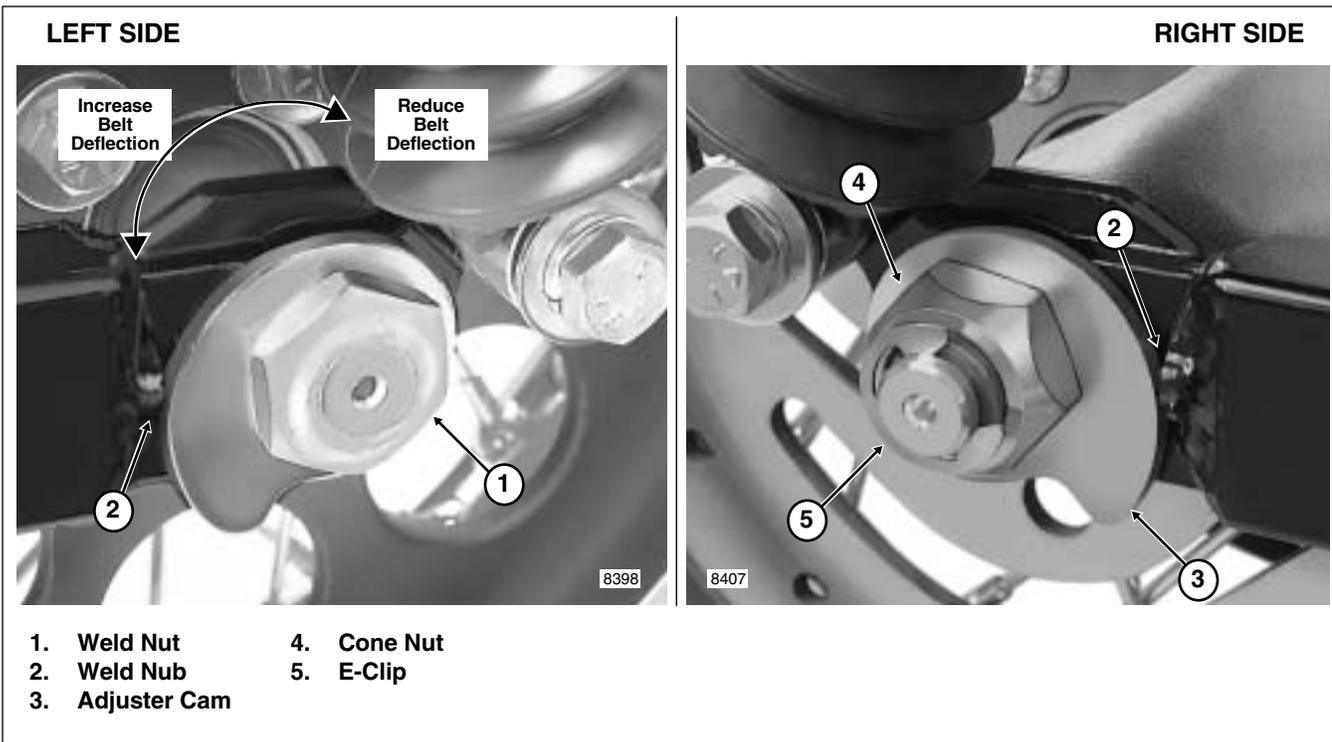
Move Rear Wheel Forward Until Adjuster Cams Just Contact Weld Nubs
